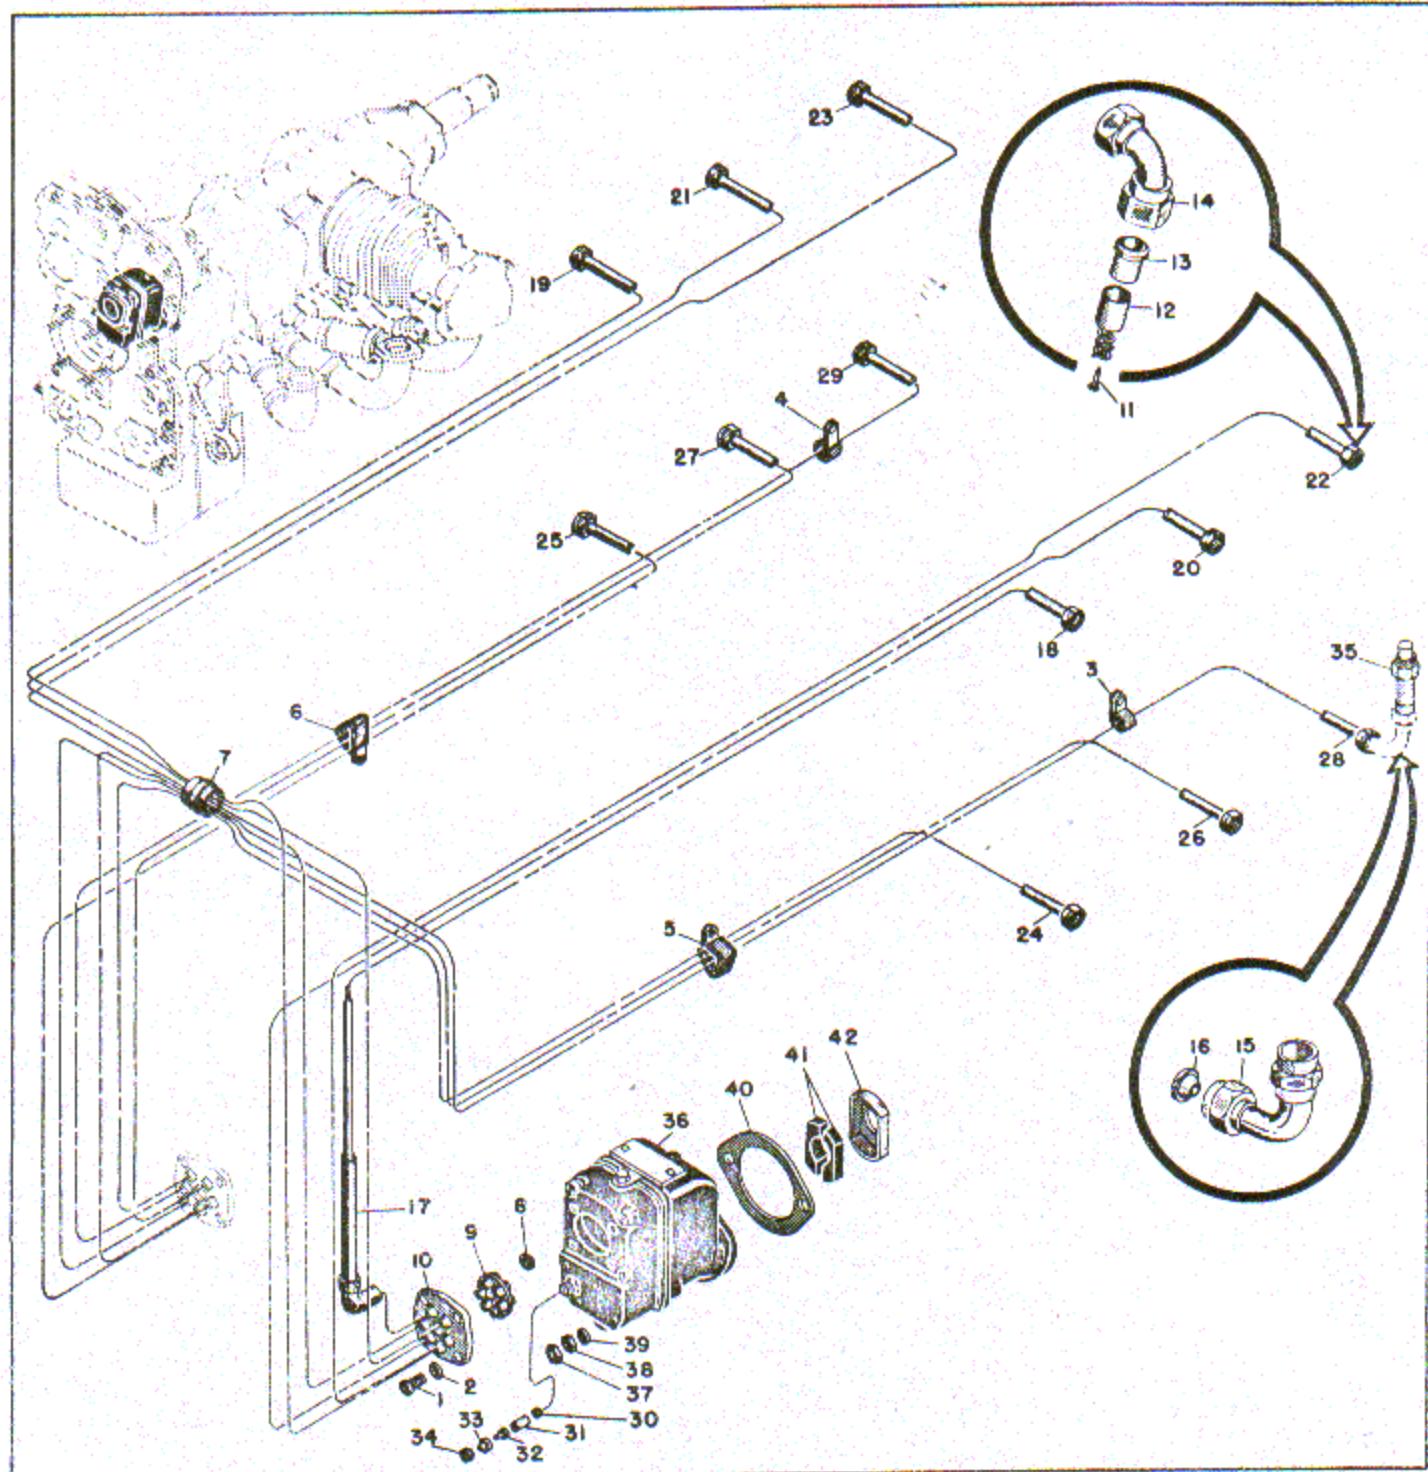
Exploded Parts View of O-470-11 Ignition System (7 mm. Cable)
